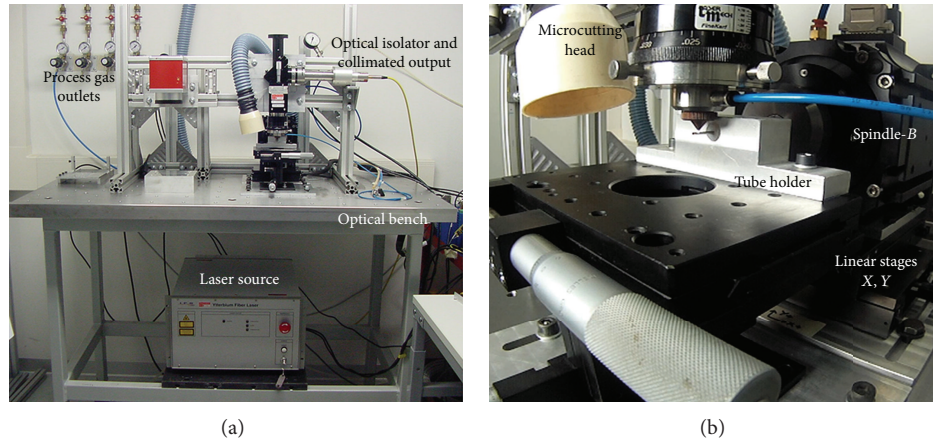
Laser microcutting setup used for the laser microcutting of AZ31 tubes.
